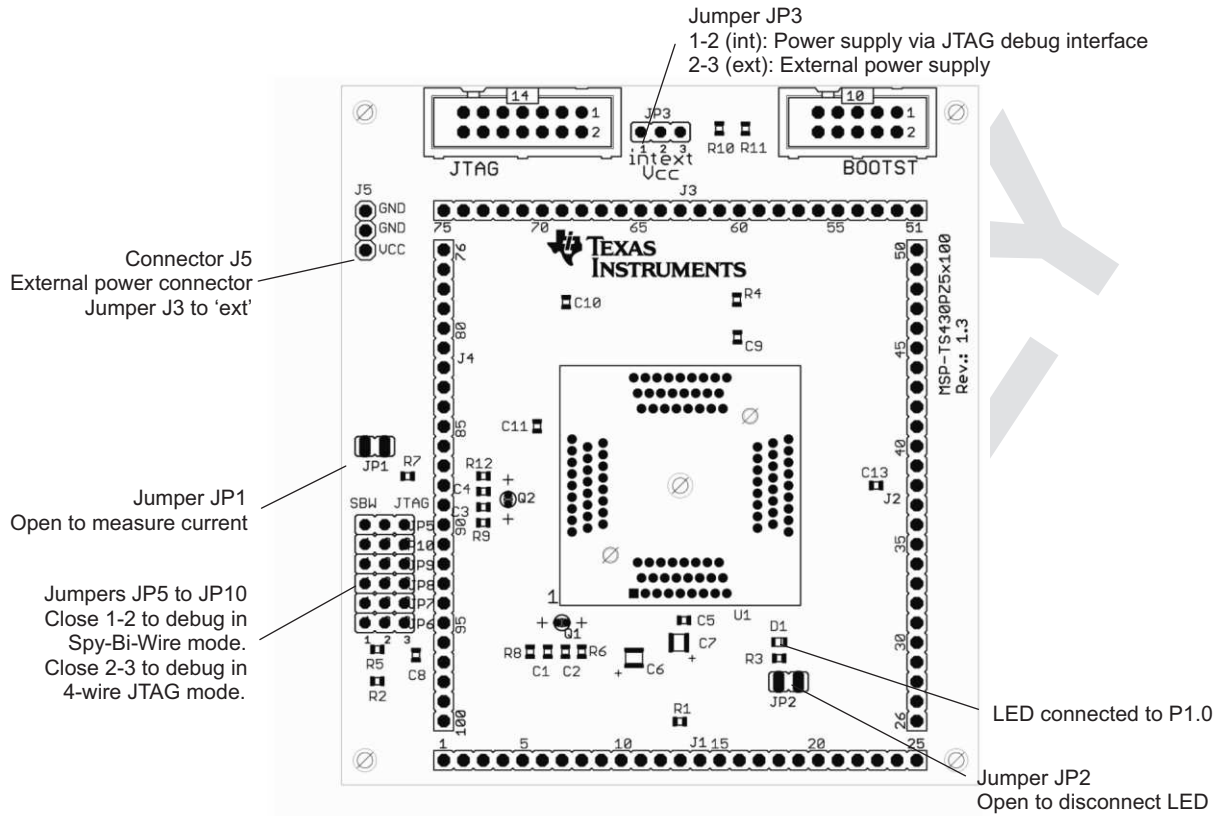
MSP-TS430PZ5x100 Target Socket Module, PCB
